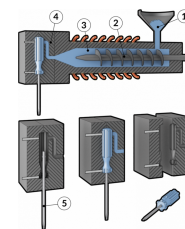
Example of how an insert is placed in the mould before the material is injected [63].
